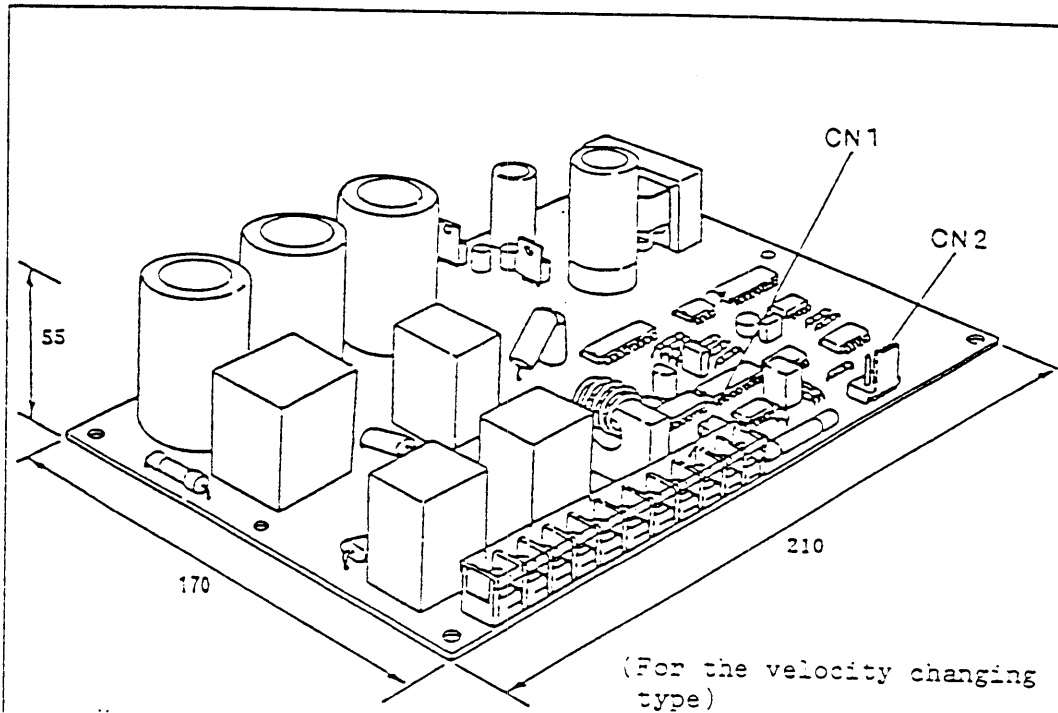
Dimensional Outline Drawing of Dynamic Brake
